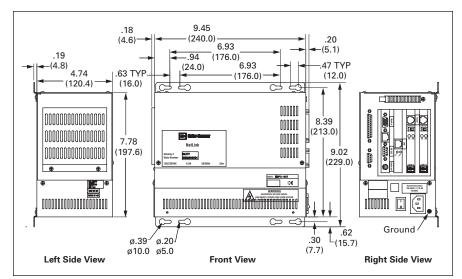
Ethernet NetLink and Mounting — Dimensions in Inches (mm)
